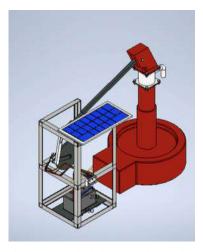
(b): Solar Powered Slider Crank Hand Pump Design
